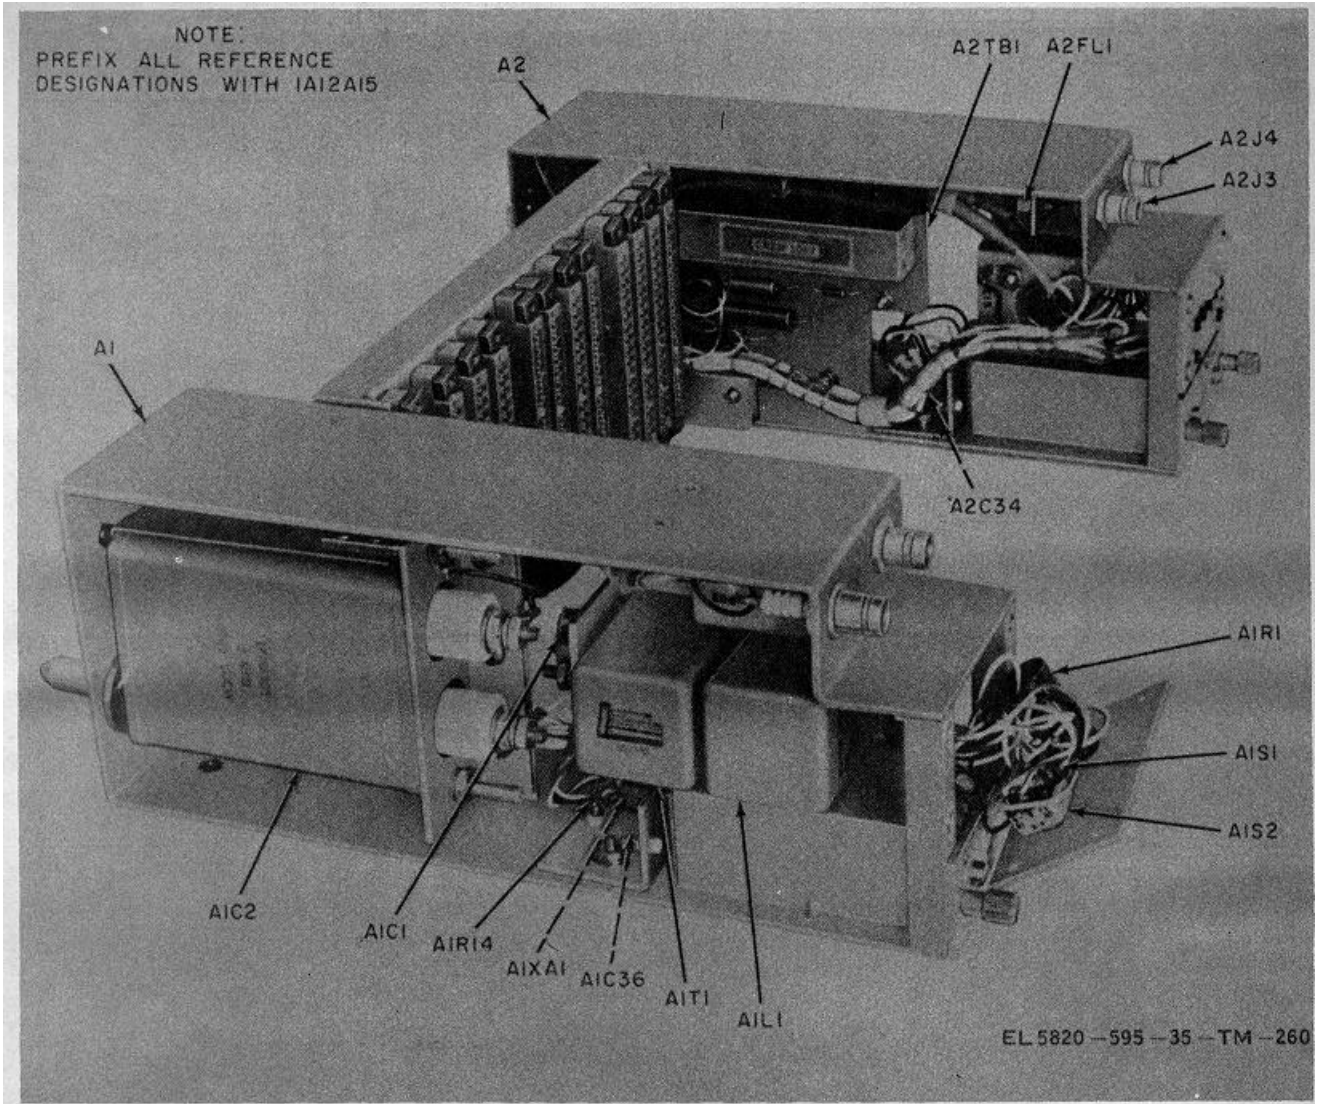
Digital data modem chassis 1A12A15, left oblique view, parts location.
